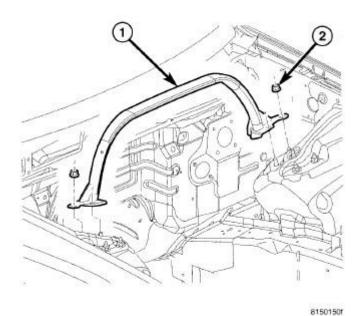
STRUT TOWER SUPPORT Courtesy of CHRYSLER LLC
